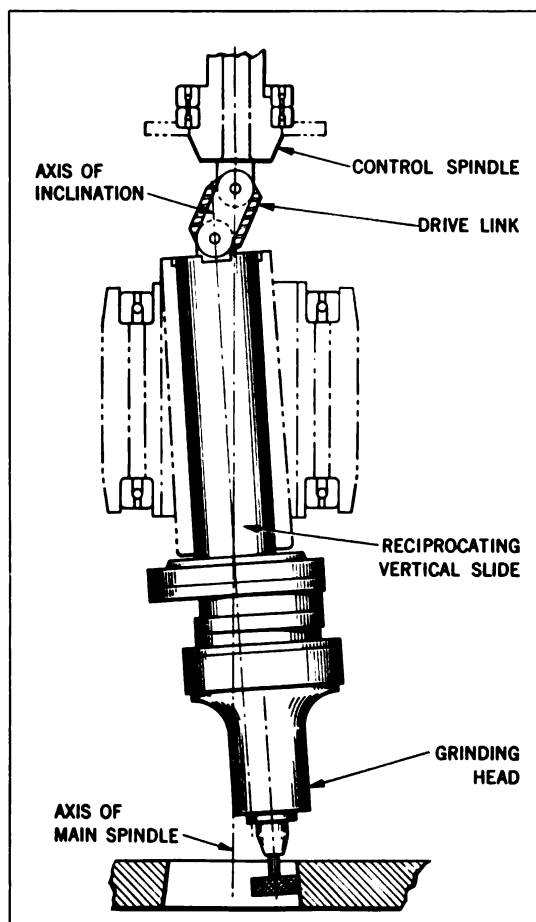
Reciprocating vertical slide mounted within inclinable guide sleeve. Main and control spindles are on a single, fixed axis.
